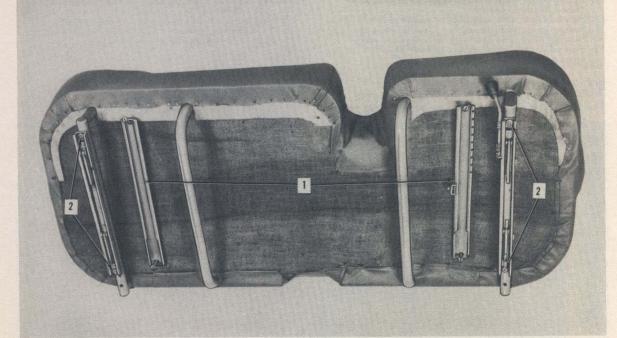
A-Removing Seat Adjuster Slides from Seat Cushion Base.
